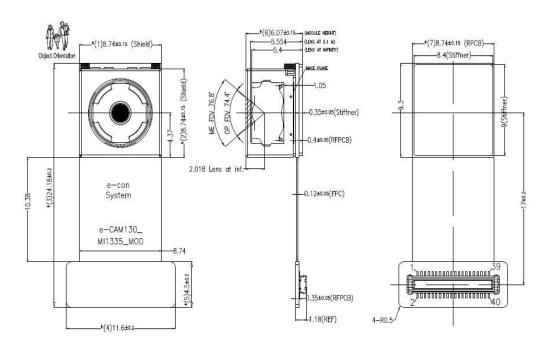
e-CAM130_MI1335_MOD Camera Module Mechanical Drawing
